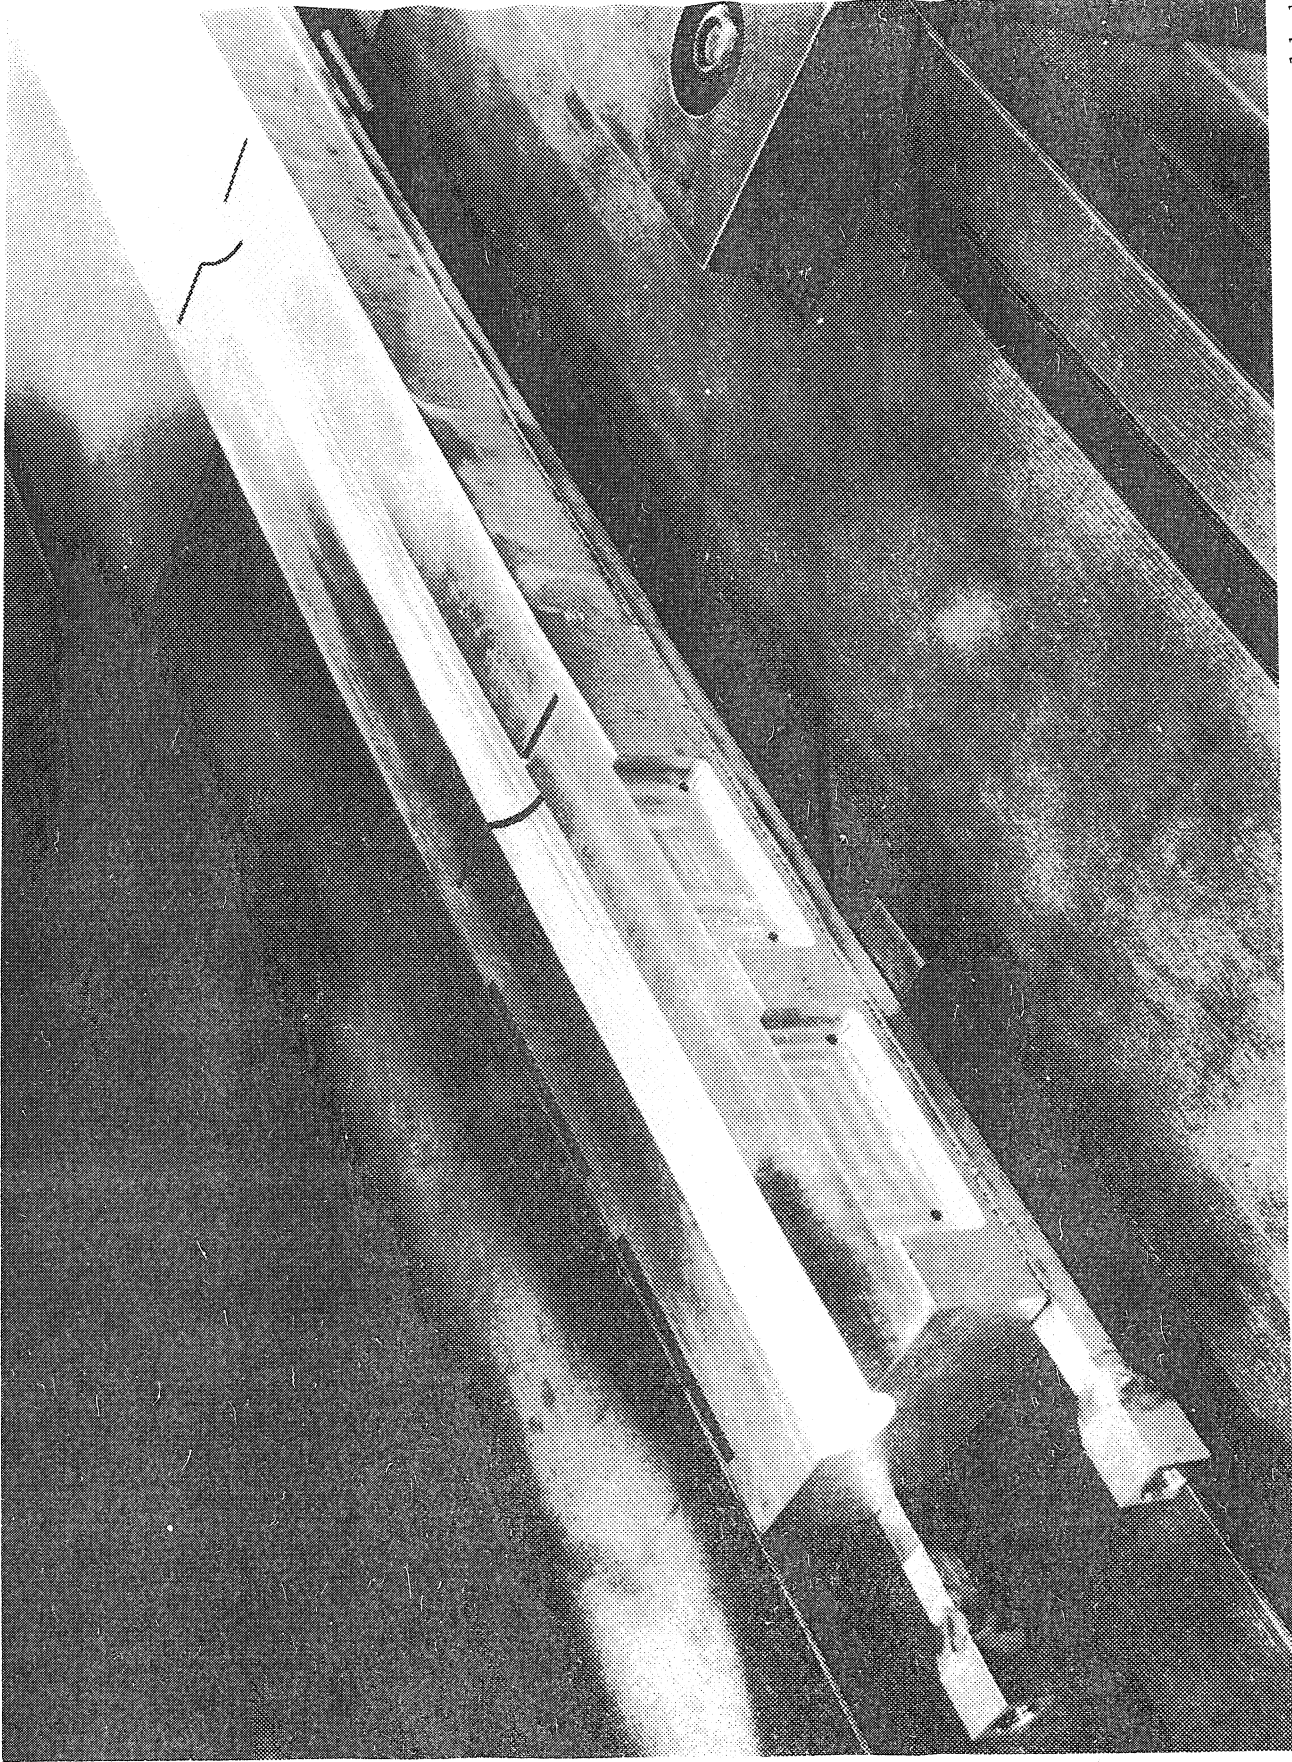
The lower half of the central aluminium core. The aluminium cooling pipes are electron beam welded into two of the corners. Several half circular grooves of which two can be seen in this photo, are machined by electro erosion transversally along the inside surface of the aluminium beam. They serve to unload longitudinal thermal stresses and bending moments in the proximity of the collimator aperture.
